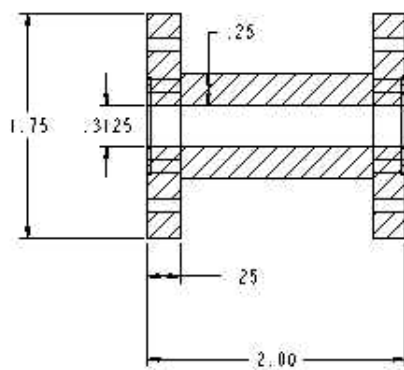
Detailed Regenerator Housing Drawing (Dimensions in Inches)
